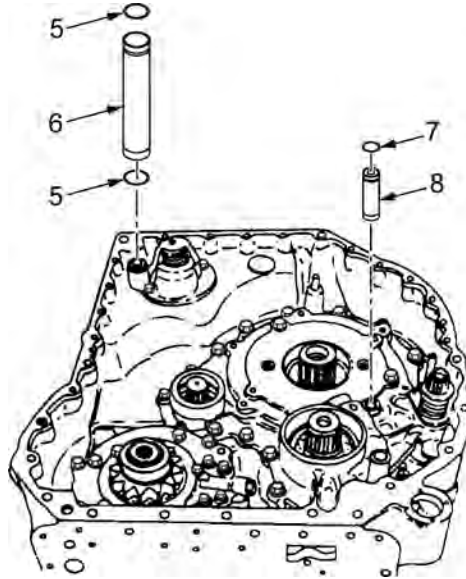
Lube Tube and Packings and Brake Apply Tube Packing Removal.
